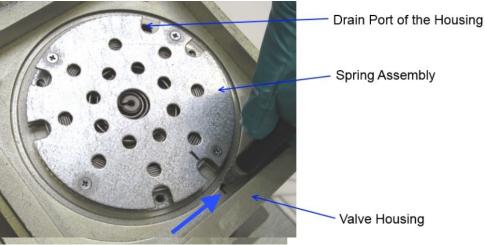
Spring Tang Highlight and Marking of Return Spring and Housing
